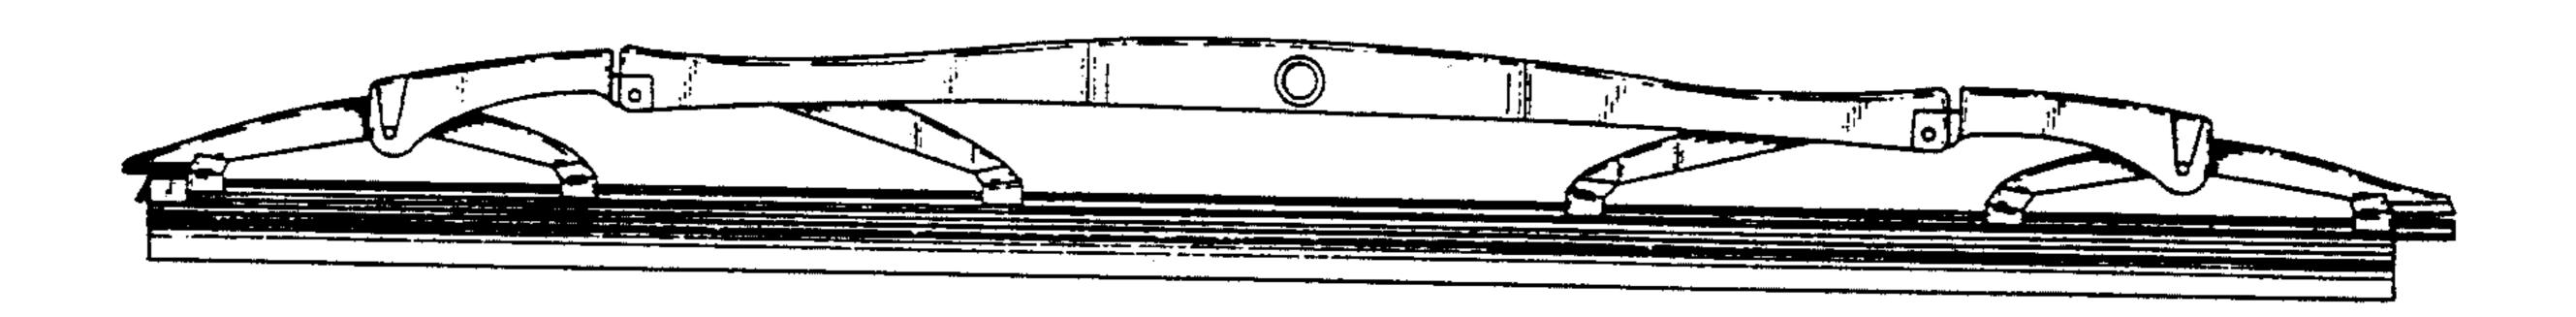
is a right side elevation view of a windshield wiper showing a second embodiment of our new design, (the left side being a mirror image thereof);
